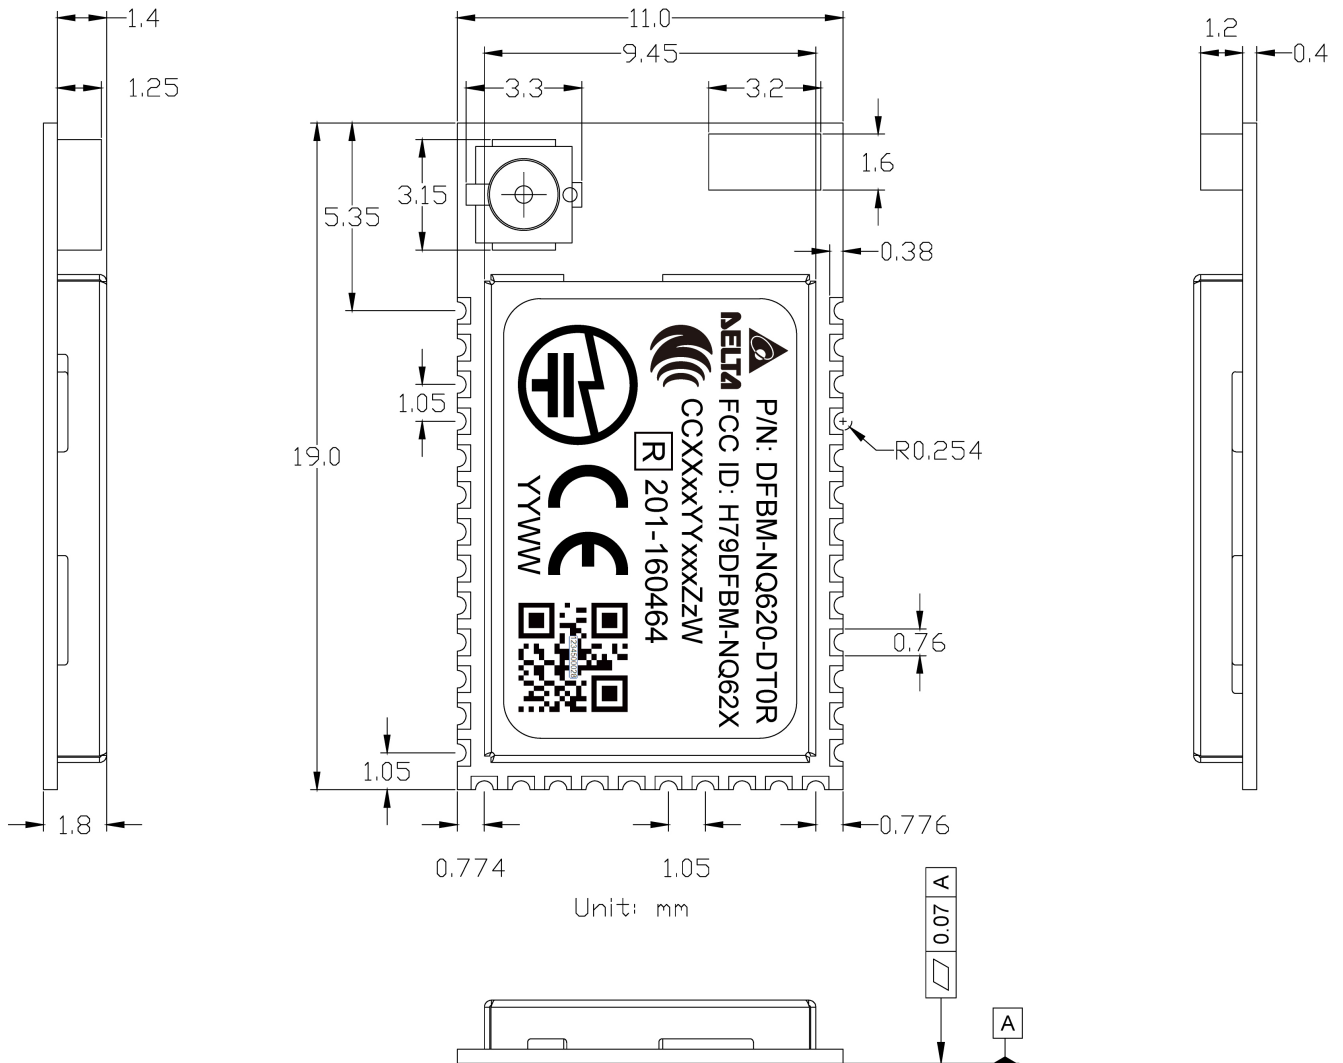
DFBM-NQ62X-DT0R Module Dimension
